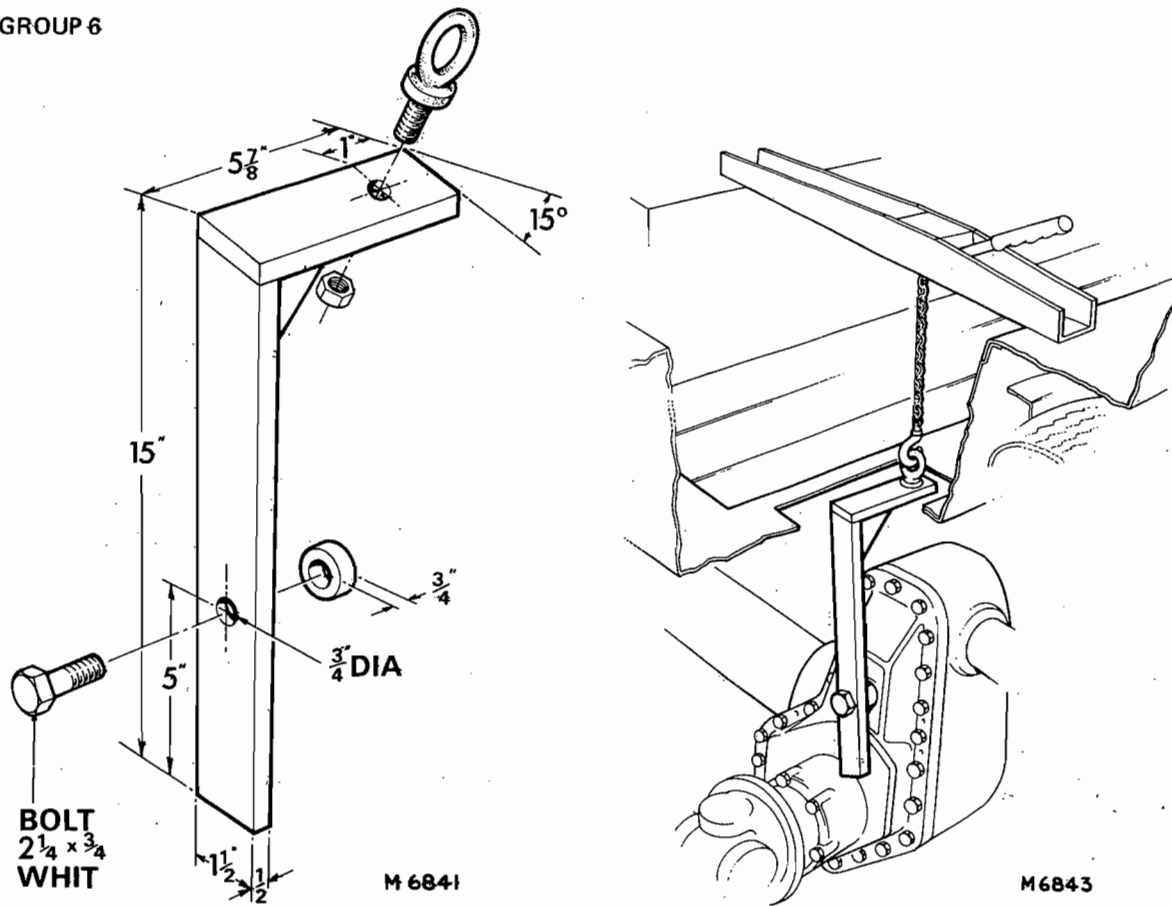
DRIVING HEAD REMOVAL BRACKET
